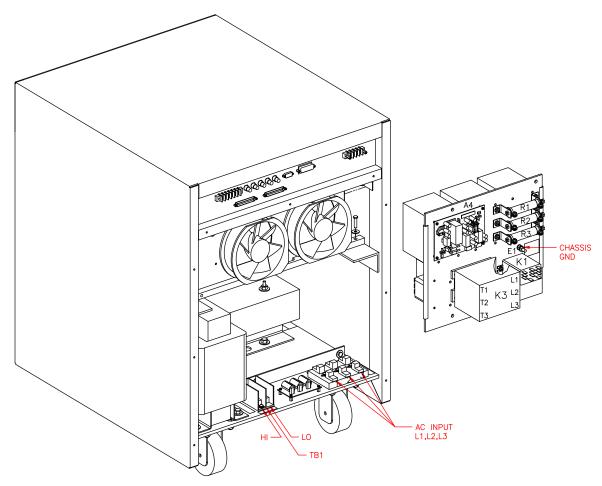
Location of AC Input Fuse Block and Chassis Ground Connection -Rear View, Access Panel Removed
